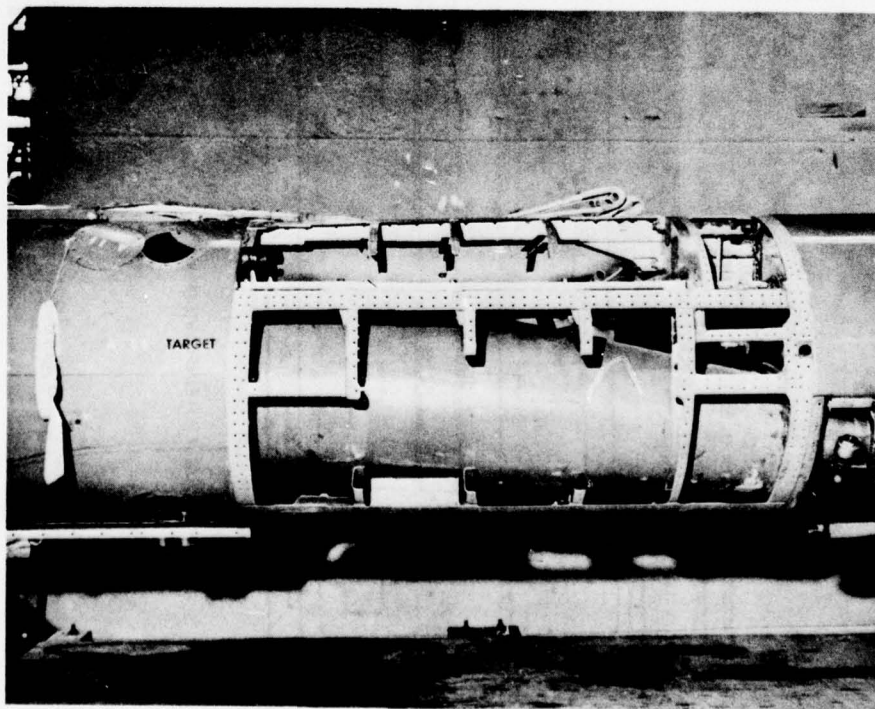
Right Side of Centerbody Section With Skins Removed
